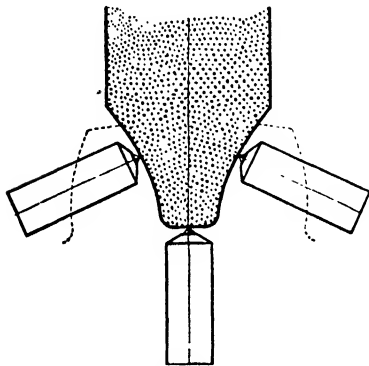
Dressing abrasive wheel for form-tooth grinding.
